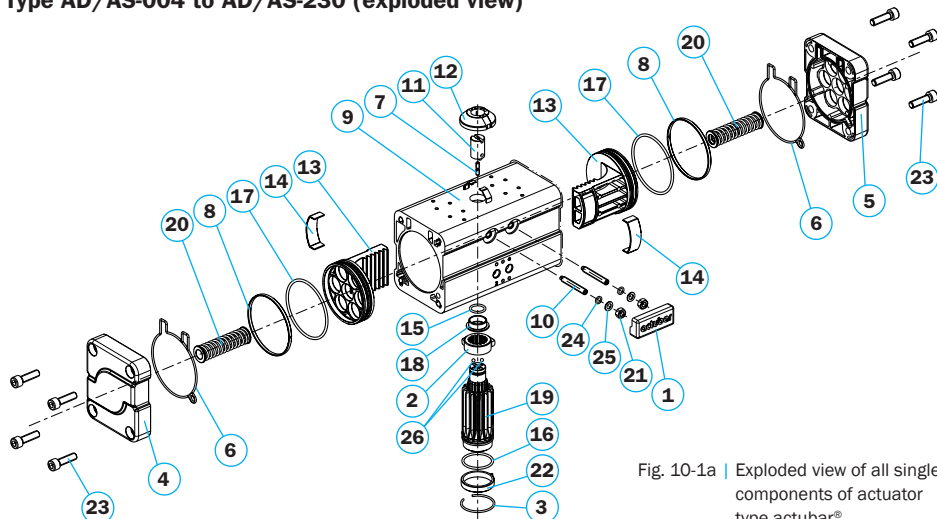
| Exploded view of all single components of actuator type actubar®
